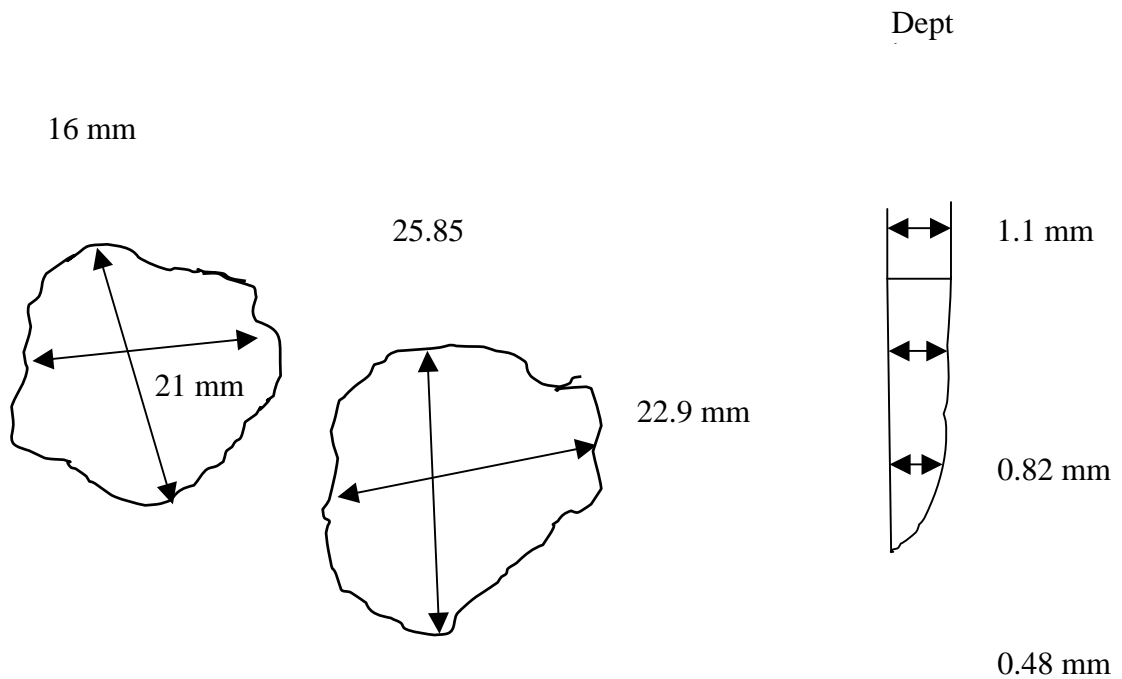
Sketch of #3 corrosion pit dimensional measurement.
